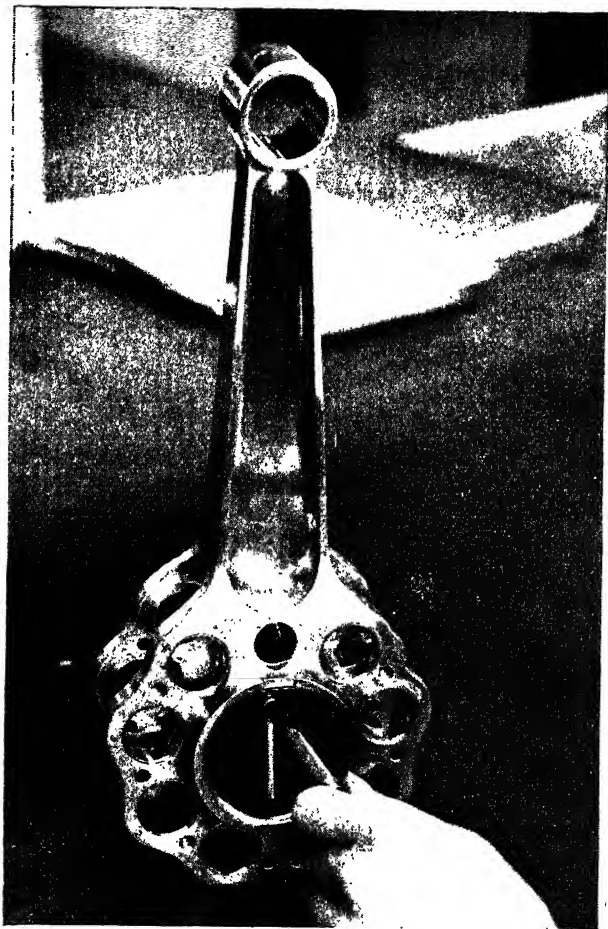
CHECKING DIAMETER OF BIG END BEARING
